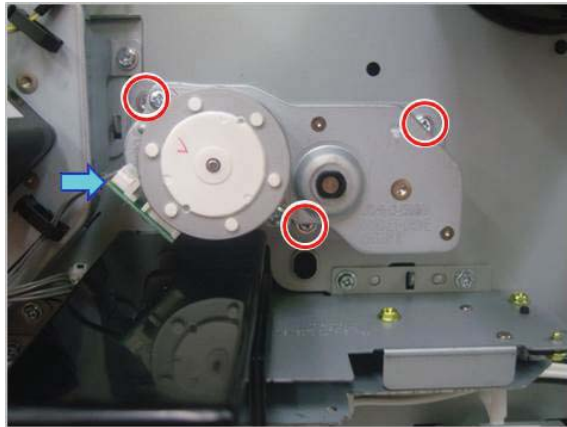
Remove the fuser drive and LVPS boards and cage
